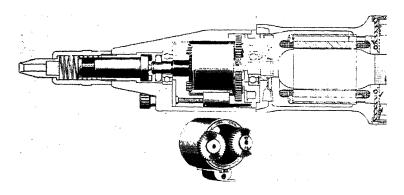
B. Torsimeter adjustable clutch. For very smooth clutch action this type of mechanism is best. Under condition of no drive, the planetary gear housing revolves. When it is desired to drive the mechanism, the adjustable brake band holds the gear housing, and driving begins. Because of the brakeband action, this transition takes place very smoothly. (Black and Decker.)
